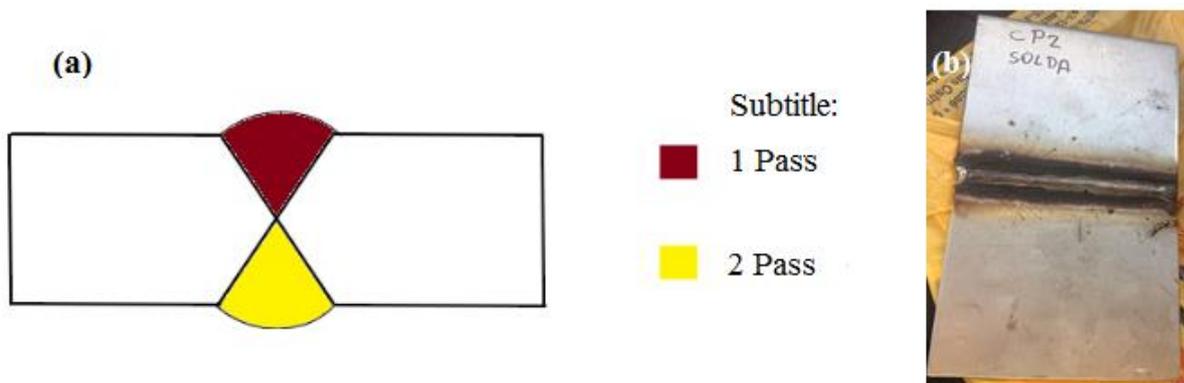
Schematic showing welding passes (a) and the plate welded (b).
